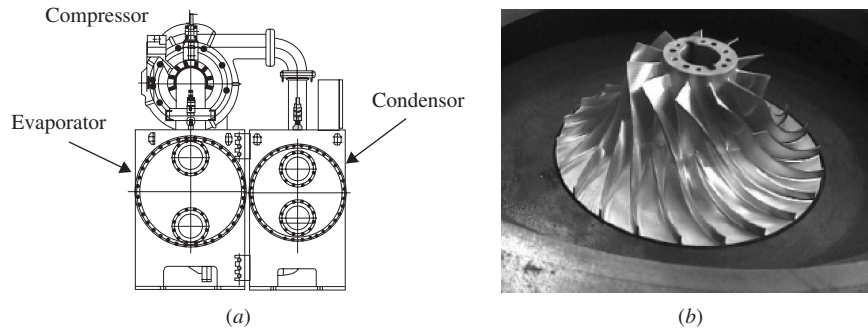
(a) Turbocooler unit and (b) impeller used in the compressor. <sup>48</sup>
